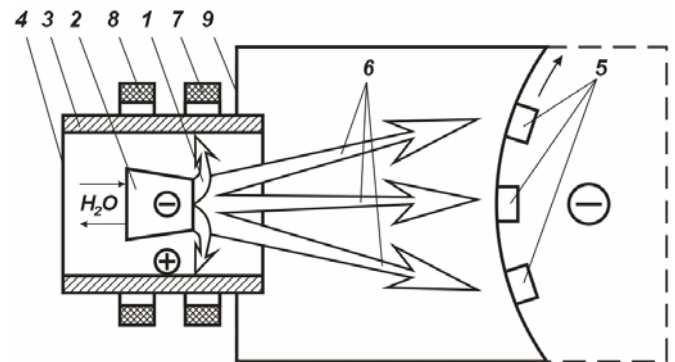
Diagram of vacuum ion-plasma sputtering plant: 1 – plasma, 2 – cathode (arc evaporator), 3 – circular anode, 4 – gun, 5 – parts being processed, 6 – material being sputtered, 7 – focusing magnetic coil, 8 – stabilizing magnetic coil, 9 – vacuum chamber
